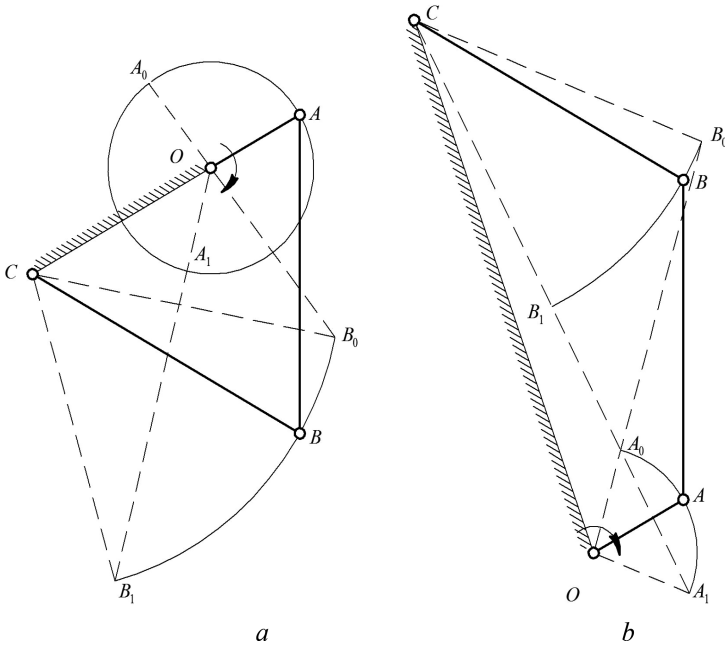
Crank-rocker (a) and two-rocker (b) mechanisms
